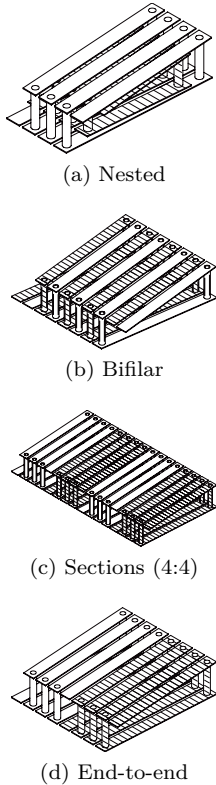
Different winding configurations of rectangular PCB embedded air-core solenoid transformers
